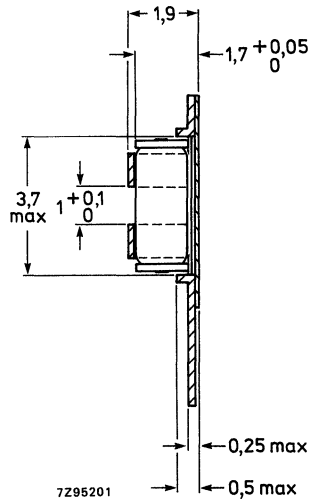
Cross-sectional view of bandolier with SOD-80 devices.
